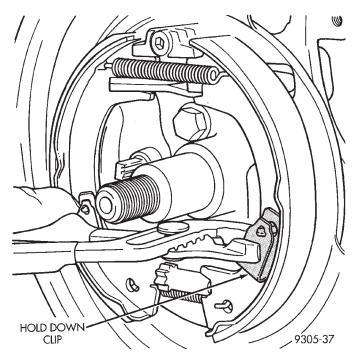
Rear Park Brake Shoe Hold-Down Clip
